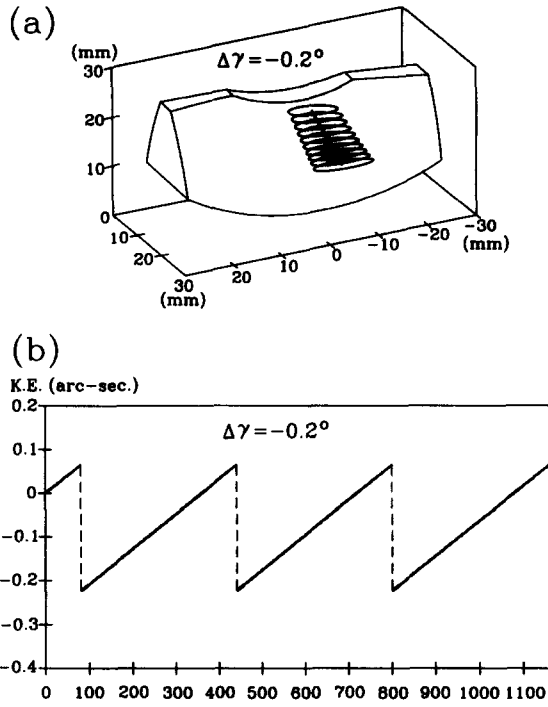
Bearing contacts and kinematic errors in a ZE-type worm gear set with axes misalignments during the worm gear cutting process.
